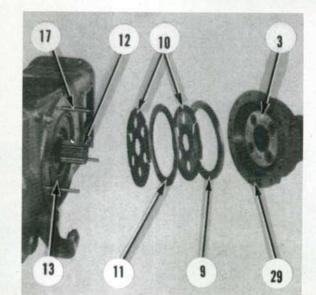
View showing Model TW-35 axle housing and brake components removed from axle center housing. One brake disc (10) is used on Models TW-5, TW-15 and TW-25.
